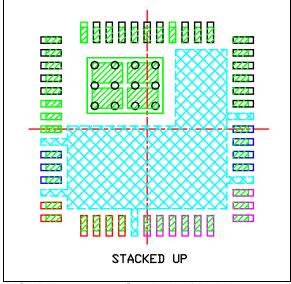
Stack-Up of Pad Layout and Solder Paste Stencil.
